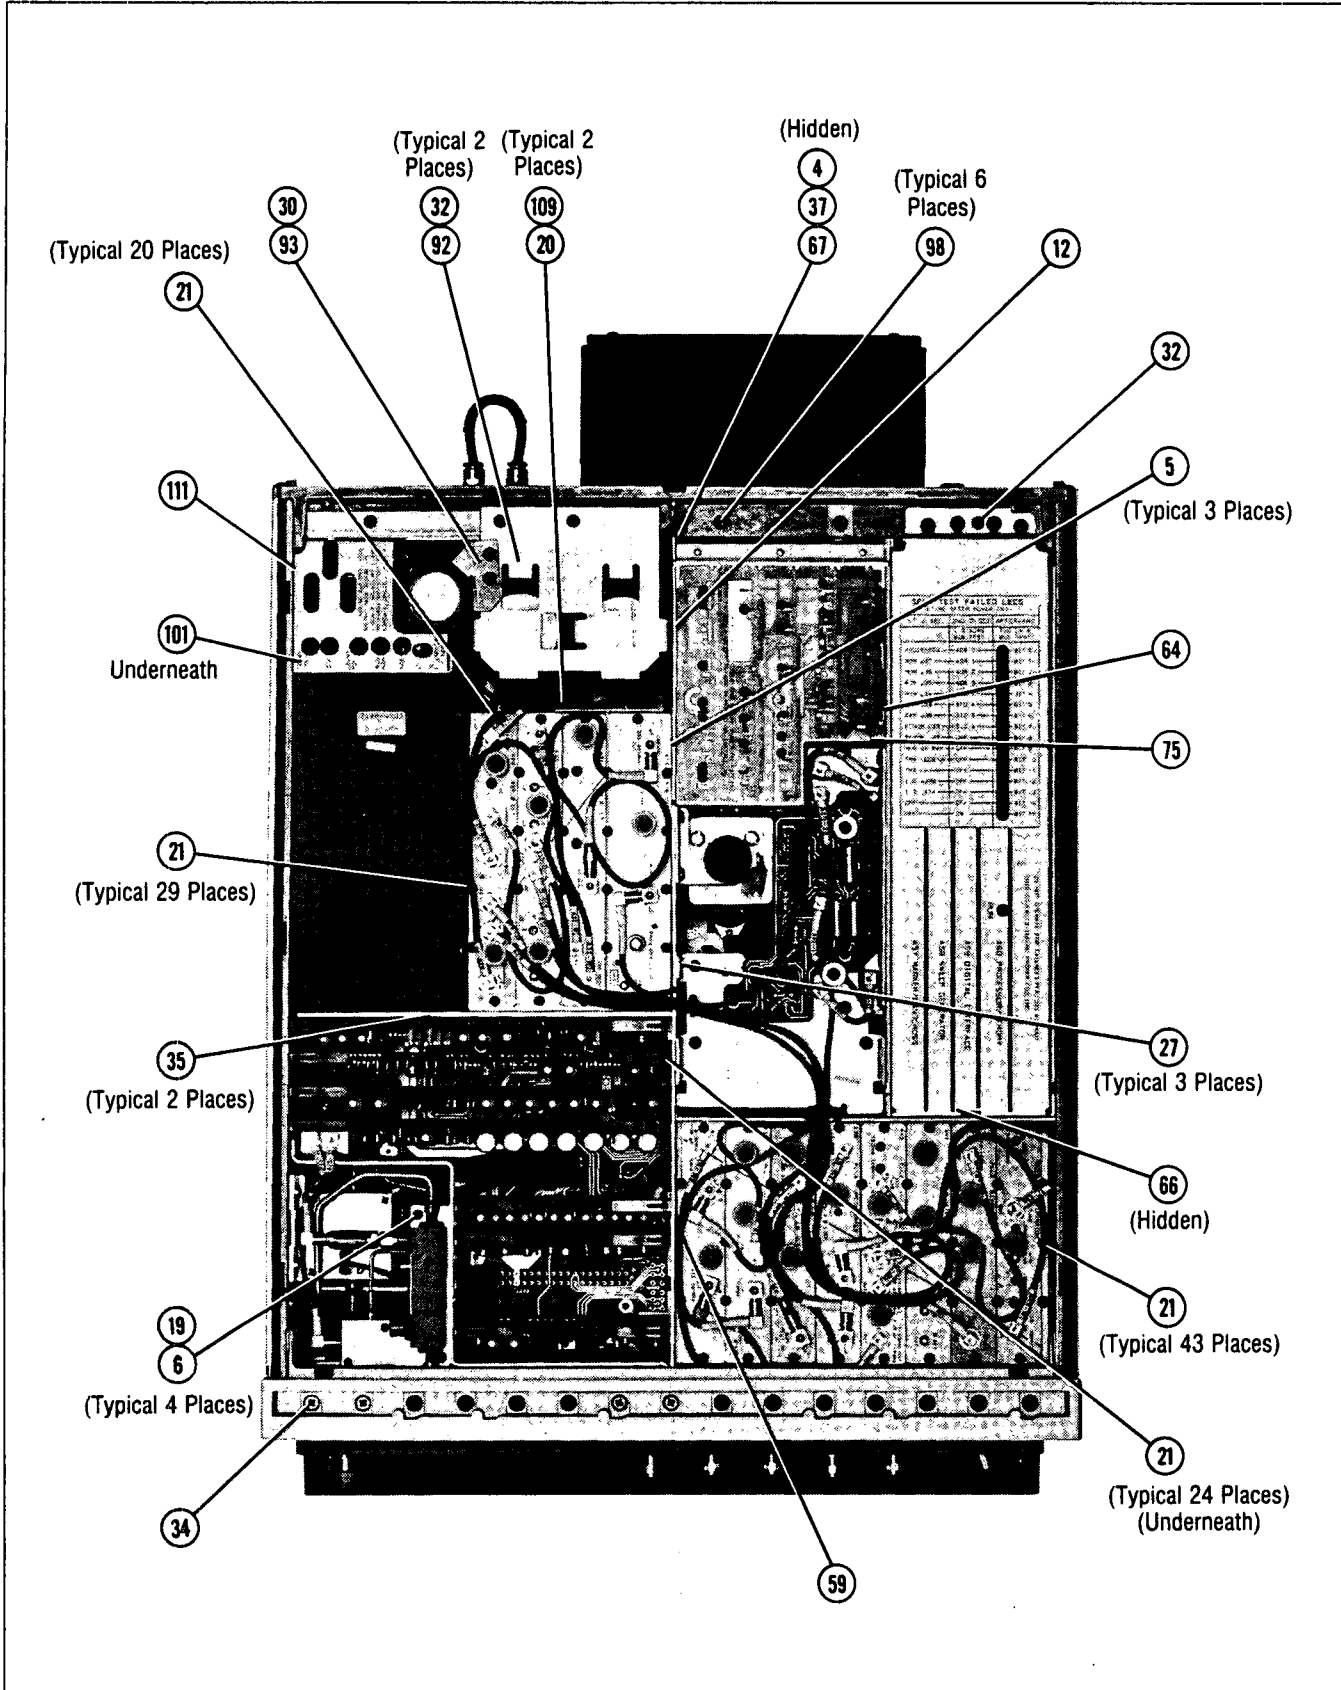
Miscellaneous Mechanical & Chassis Parts (4 of 6)
